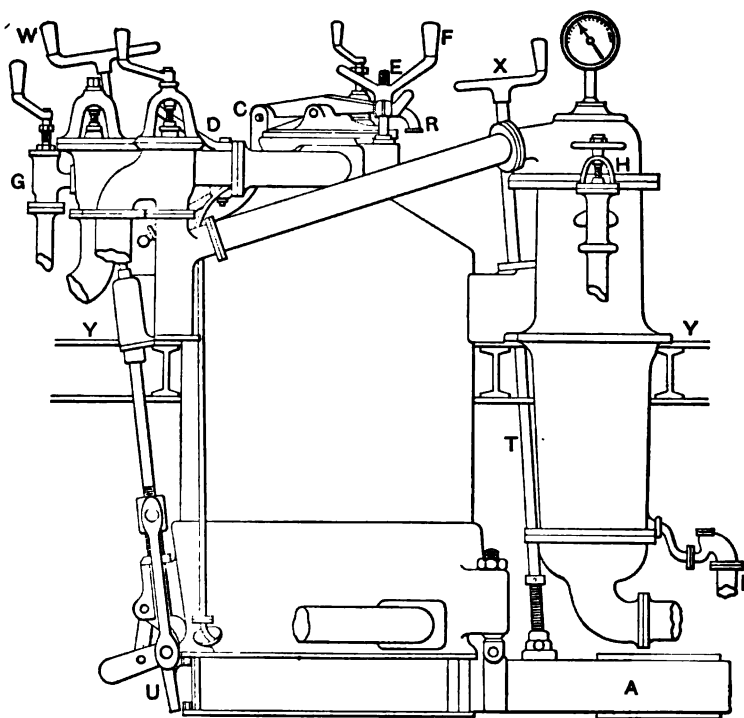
FIVES LILLE Arrangement for Opening Large Bottom Valve from Above.
